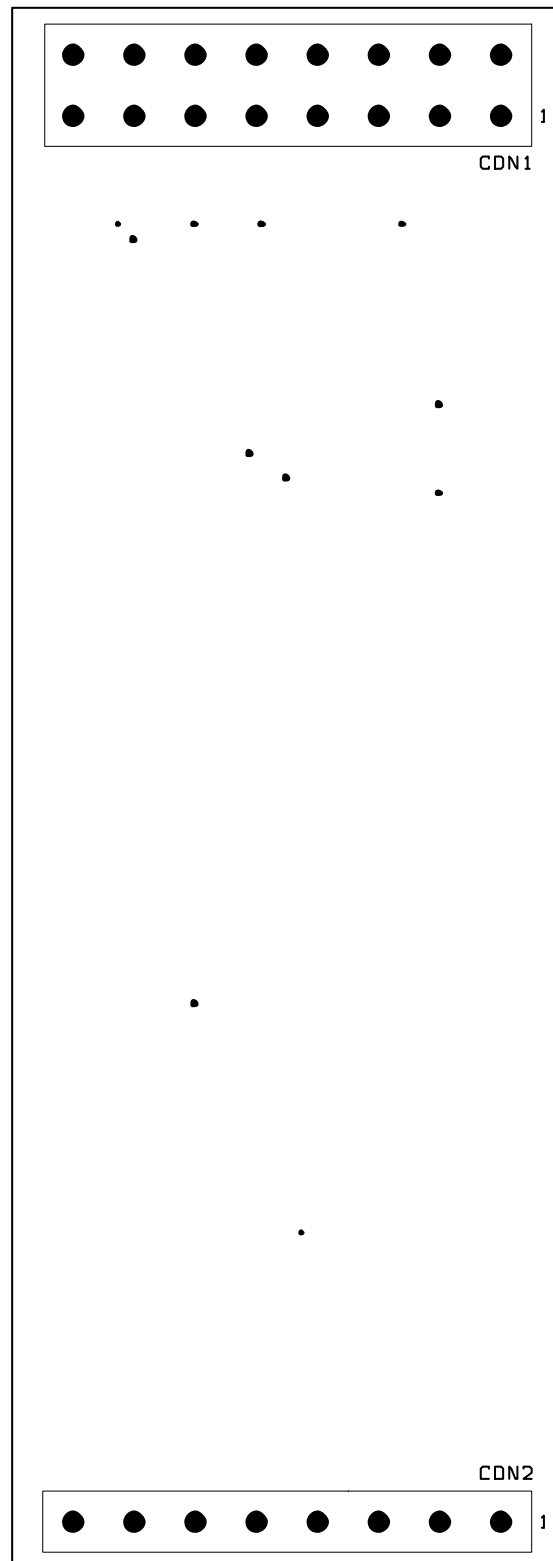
U_p Port Line Interface Subassembly board (bottom side inscription)
